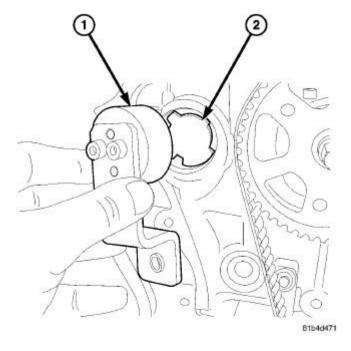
Removing/Installing Camshaft Locking Tool Courtesy of CHRYSLER LLC
